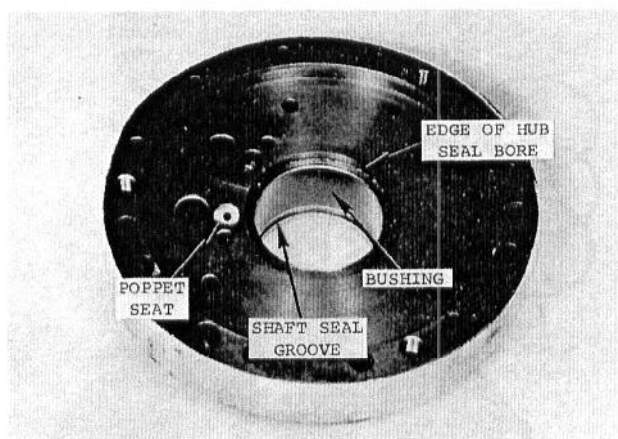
Inspecting Bushing and Poppet Seat in Top Plate
